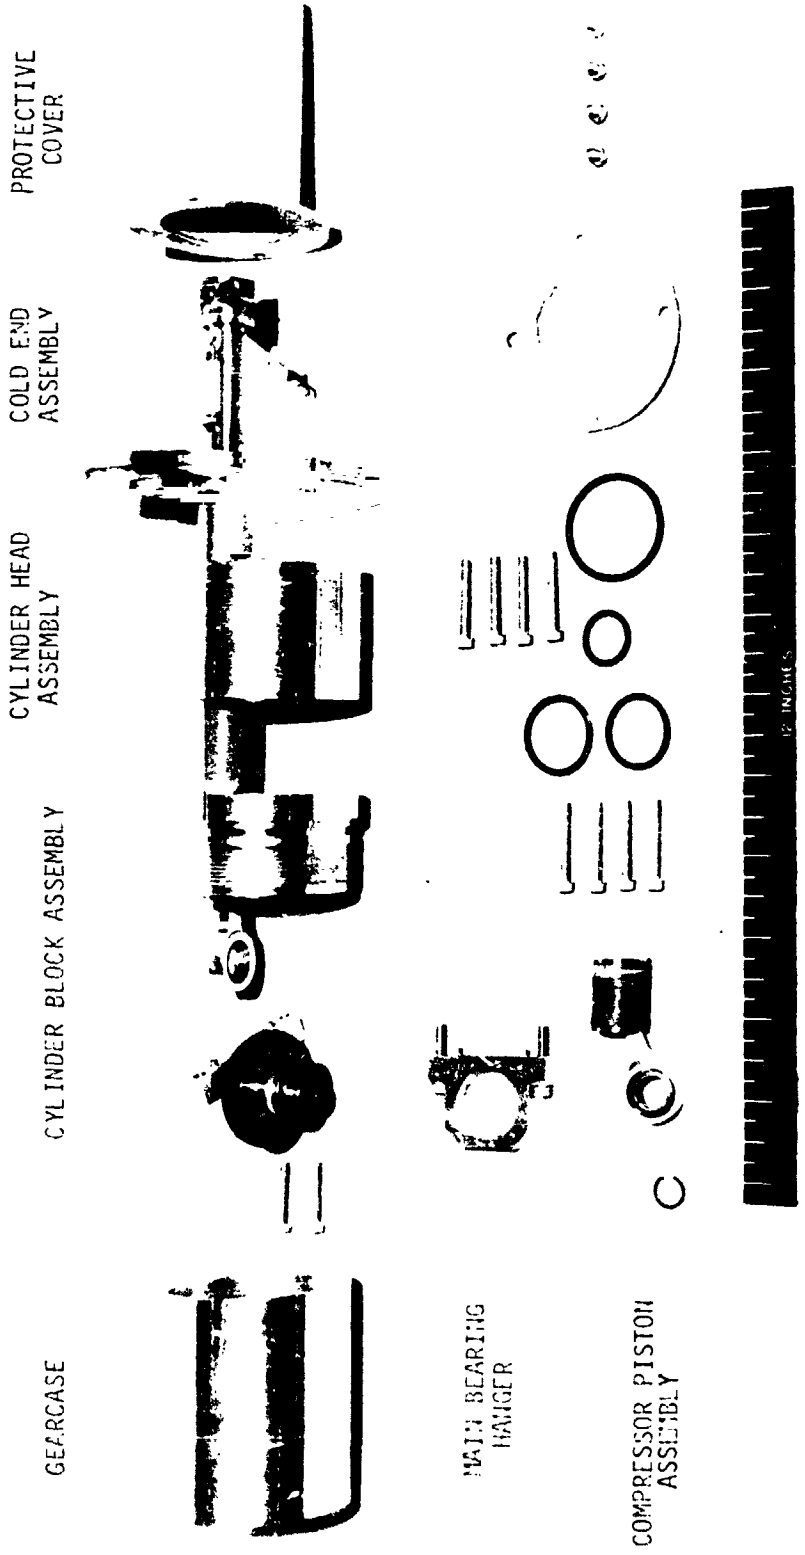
Exploded View of S191 Cryogenic Cooler (Less Drive Motor and Outer Case)
